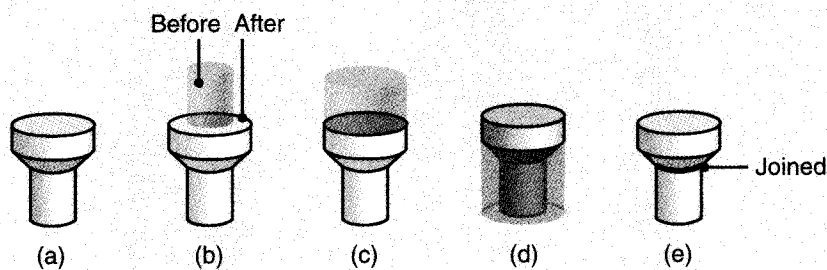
Various methods of making a simple part: (a) casting or powder metallurgy, (b) forging or upsetting, (c) extrusion, (d) machining, and (e) joining two pieces.
